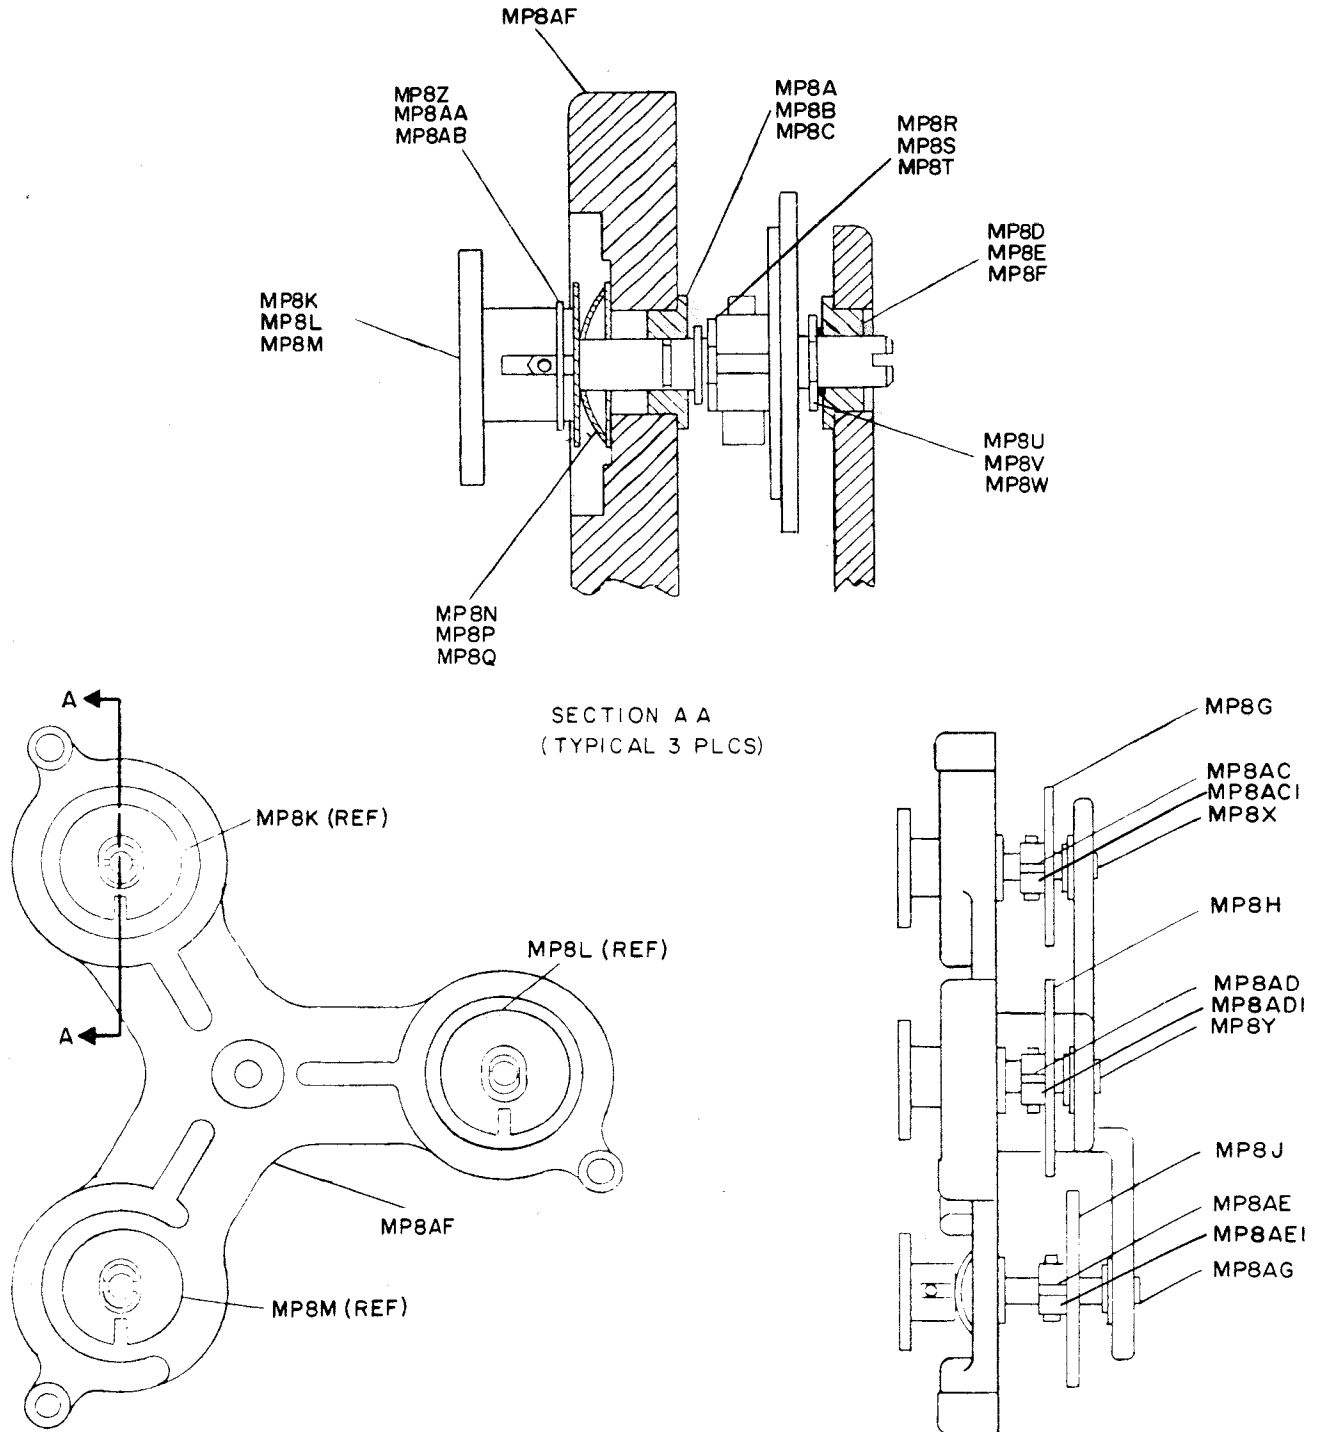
Triple-Sprocket Assembly A2MP8, Component Locations
